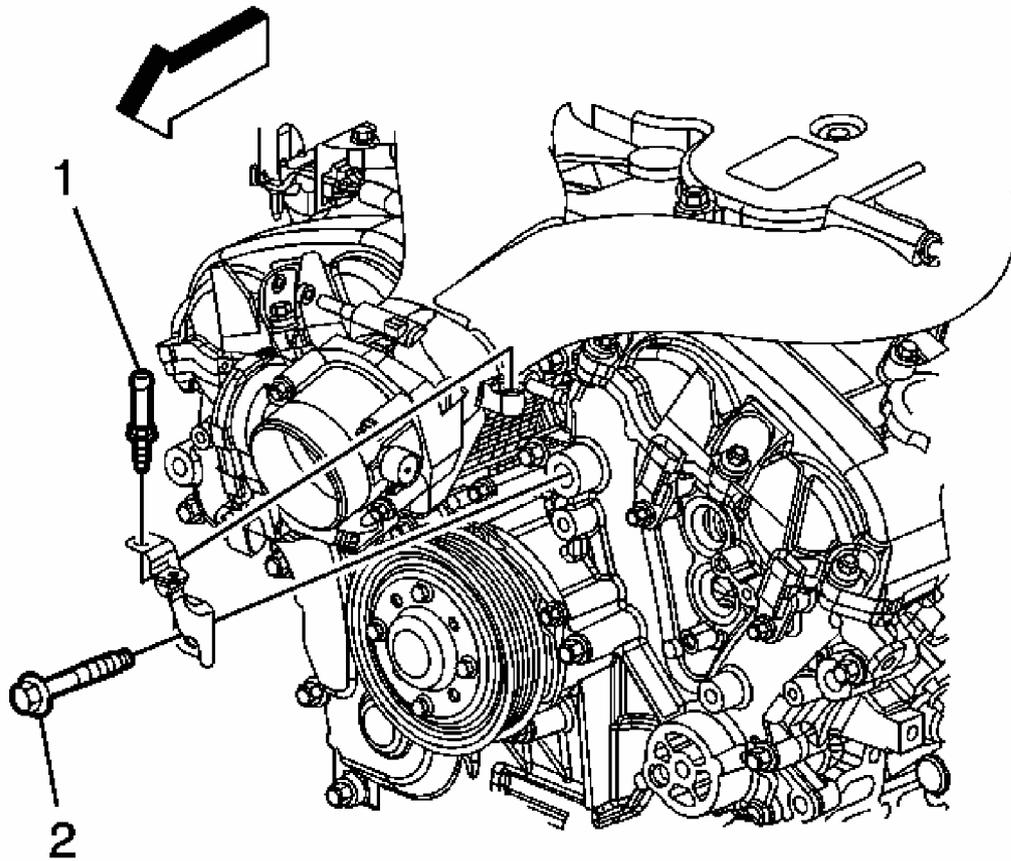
Identifying Upper Intake Manifold Brace Stud, Bolt & Brace
